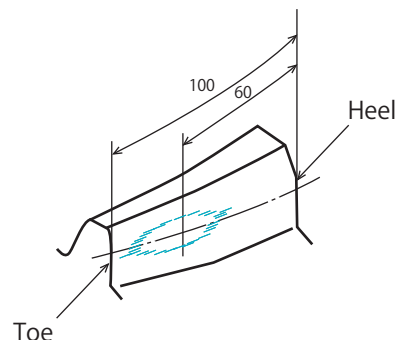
Tooth bearing for Bevel gear with Crowning.
